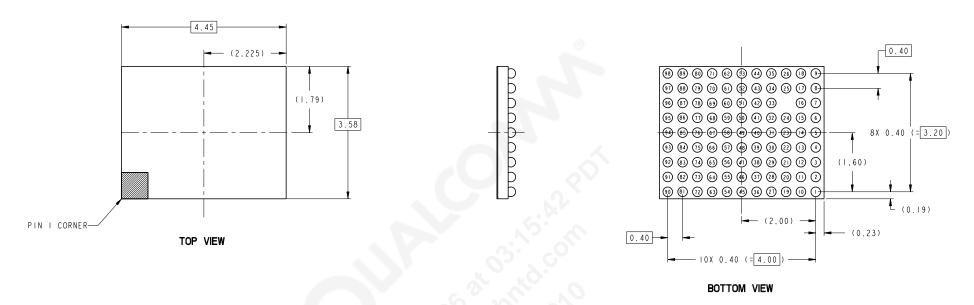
98 WLNSP (4.45 × 3.58 × 0.55 mm) package outline drawing
